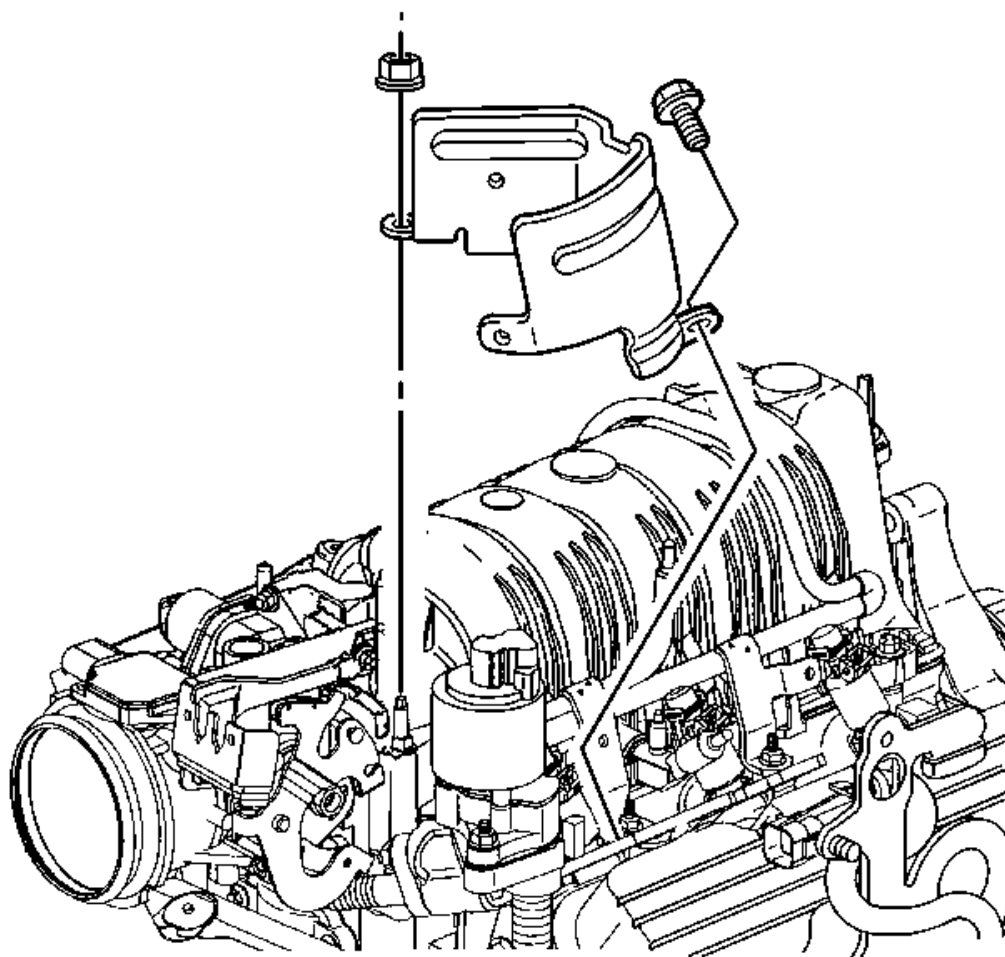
Installing EGR Valve Wiring Harness Heat Shield
